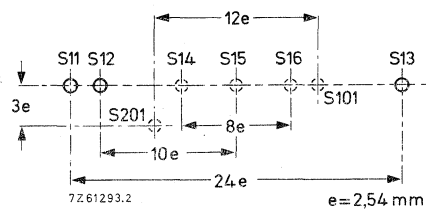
Hole pattern of the printed-wiring board for a single potentiometer (viewed on component side).
